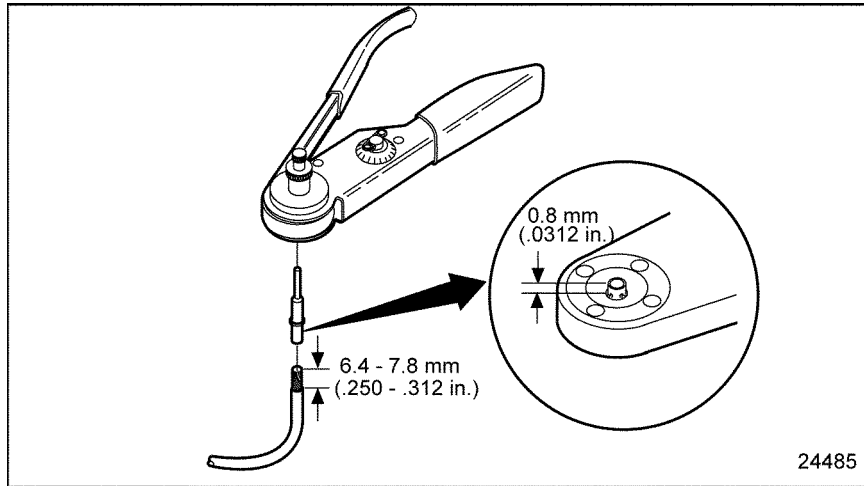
Setting Wire Gage Selector and Positioning the Contact
